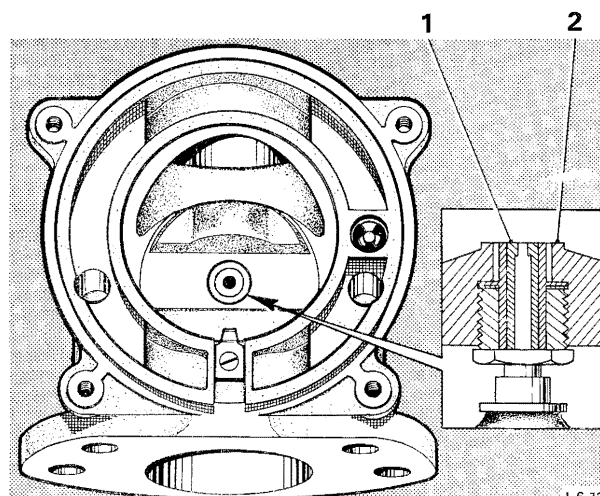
CARBURETTER JET SET FLUSH WITH THE BRIDGE PIECE
